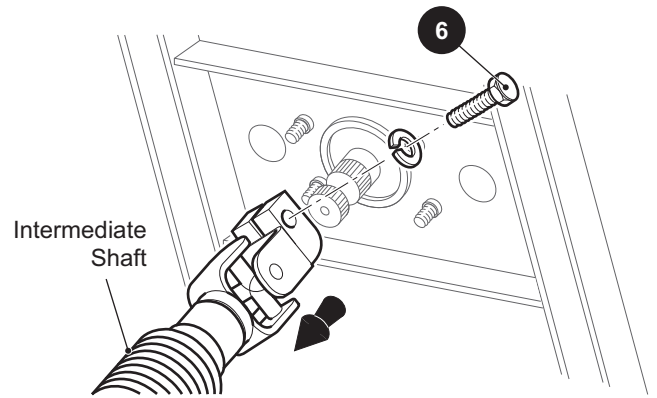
Disconnect Intermediate Shaft to Center Steering Wheel
